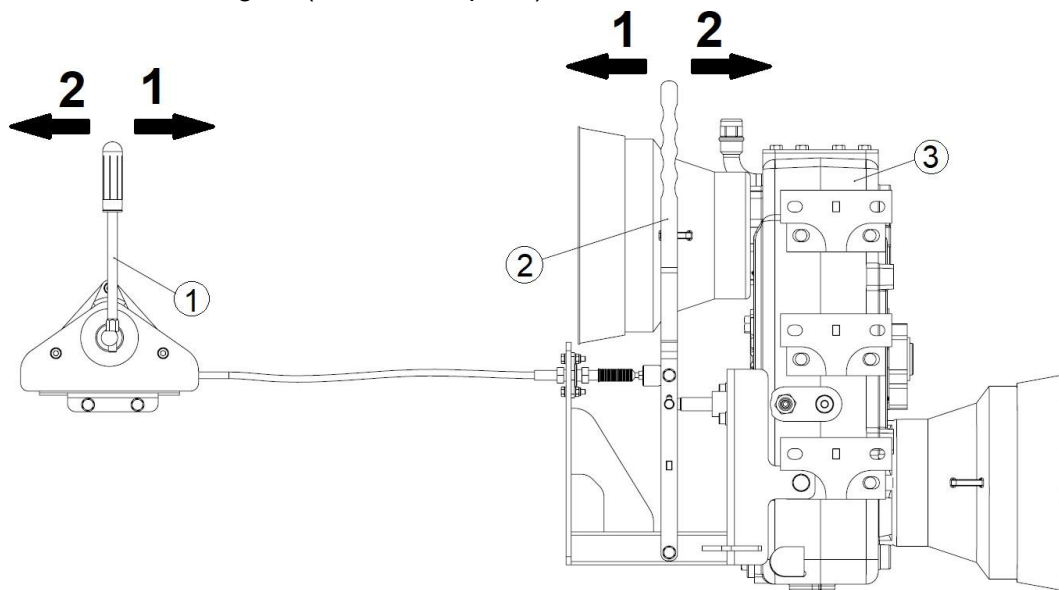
Gear ratio change in a two-speed gear: 1 - gear ratio change lever, 2 - gear ratio change lever at the gear, 3 - two-speed gear
